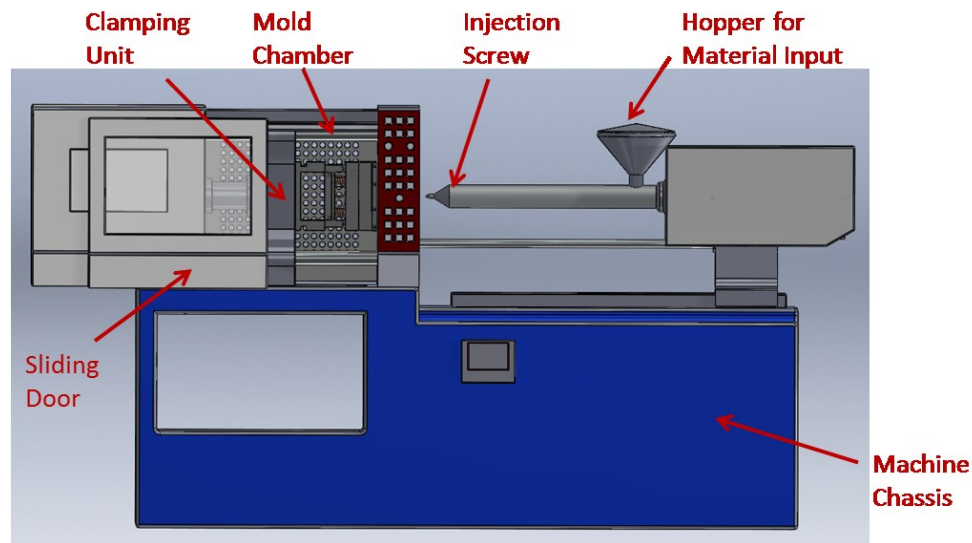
3-D Model of a Standard 40-ton Nissei Injection Molding Machine
